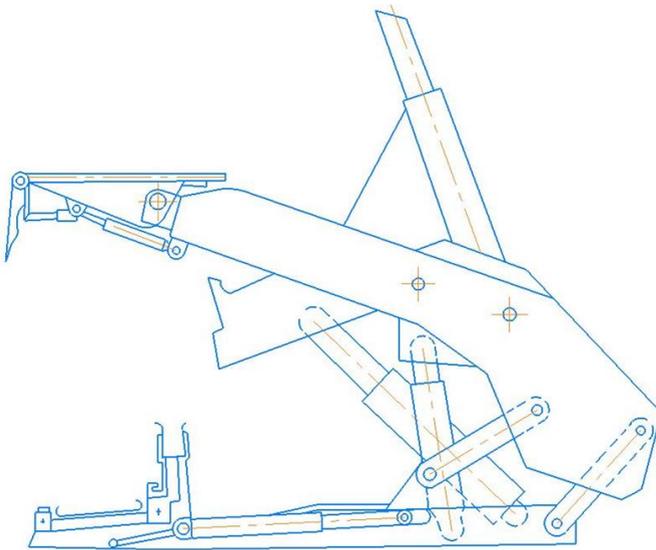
Schematic diagram of the section of active powered support KAM2C
